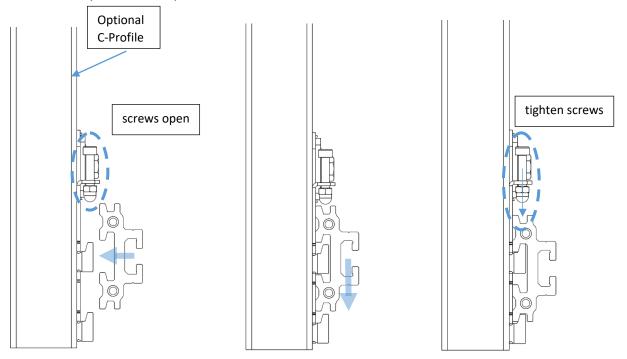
Side view inserting profile to wall mounting plate (step by step from left to right)
